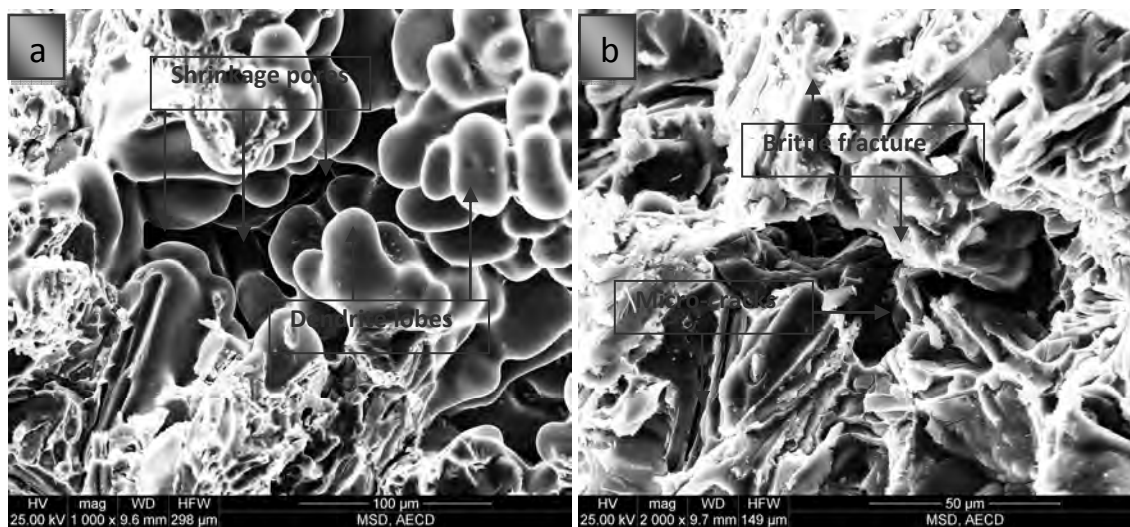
Fracture surface morphology of the peakaged Alloy-7 after impact test
